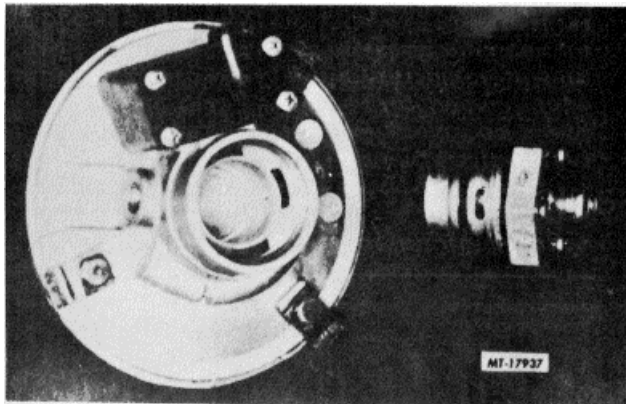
AD-2 End Cover Assembly with Purge Valve Assembly
